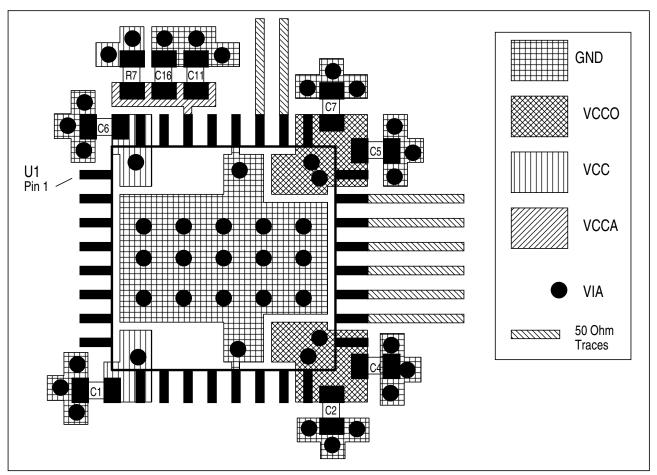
B. PCB BOARD LAYOUT FOR ICS8735-01
